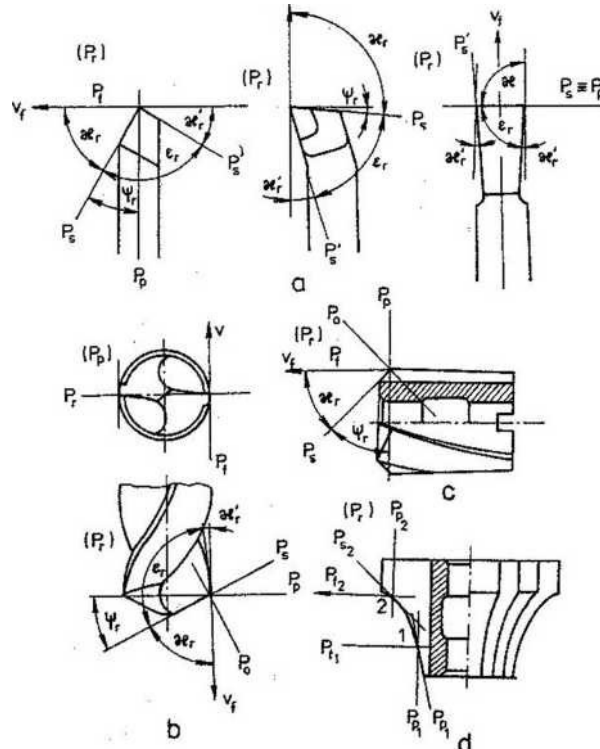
Tools in P_r plane: a) turning tool; b) spiral drill; c) end mill; d) tooth-formed mill
